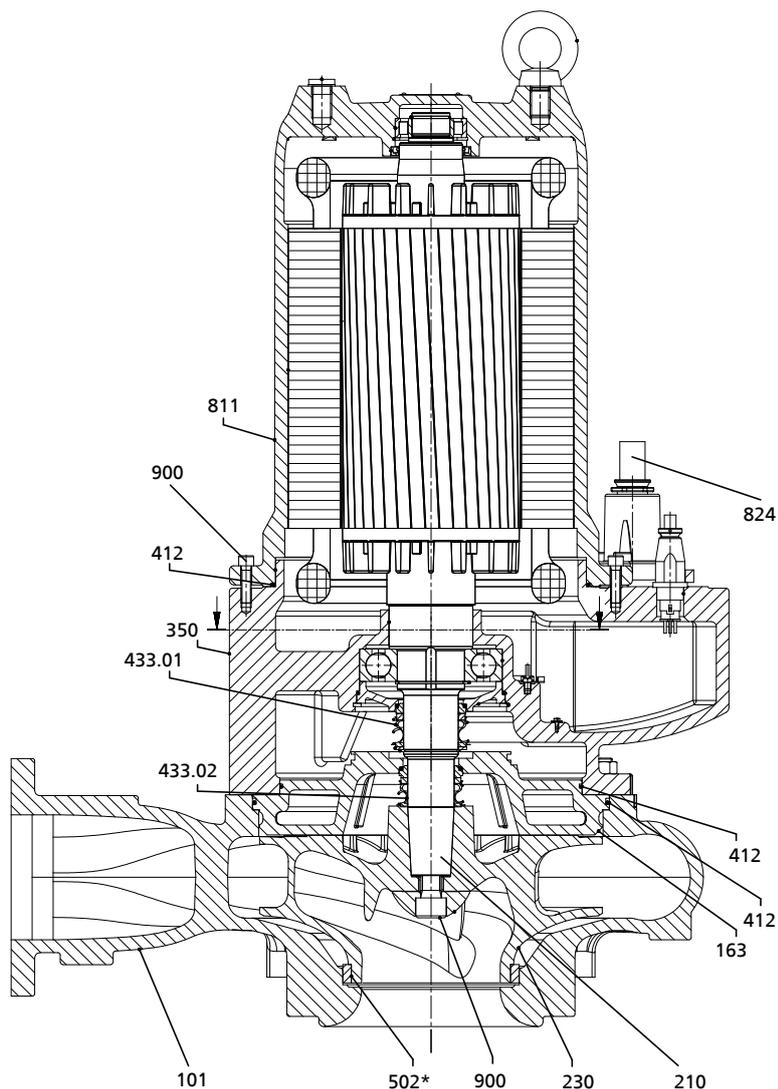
General assembly drawing, example: Amarex KRT E/K 100-400/75 4 XEG
